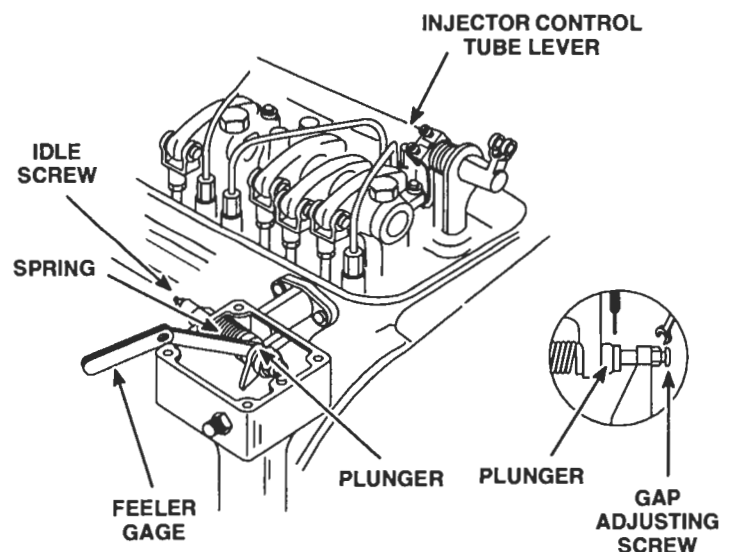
Adjusting Gap (Double-Weight Governor) using Tool J 3172
